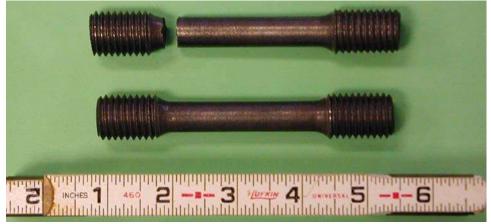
Brittle Failure of Cast Iron Specimen
